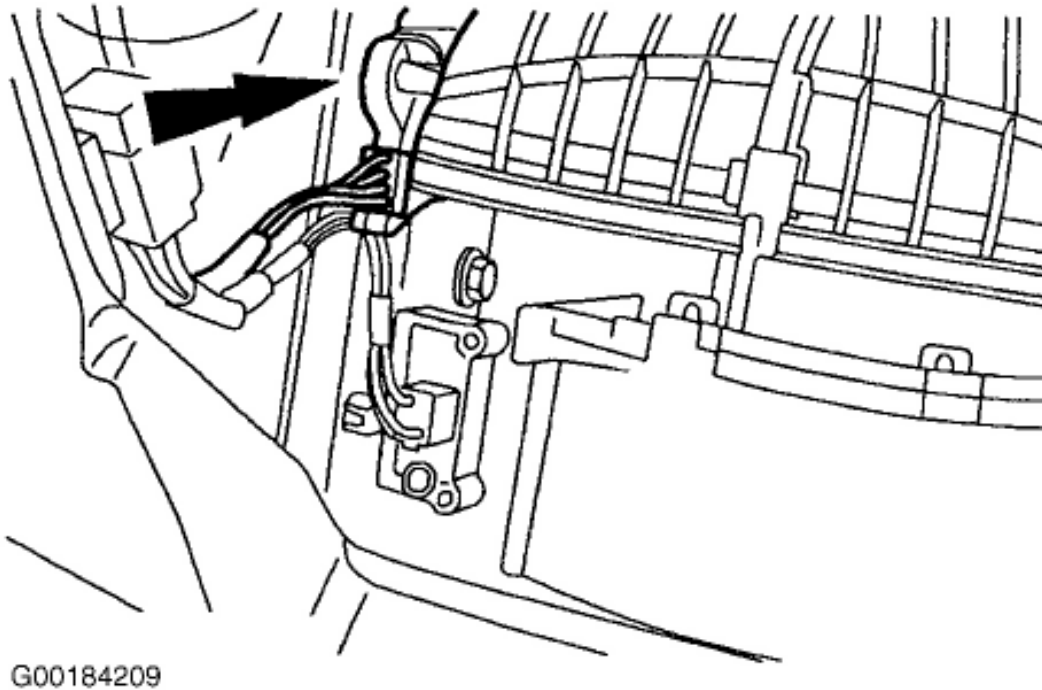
Removing & Installing Passenger Compartment Air Filter
